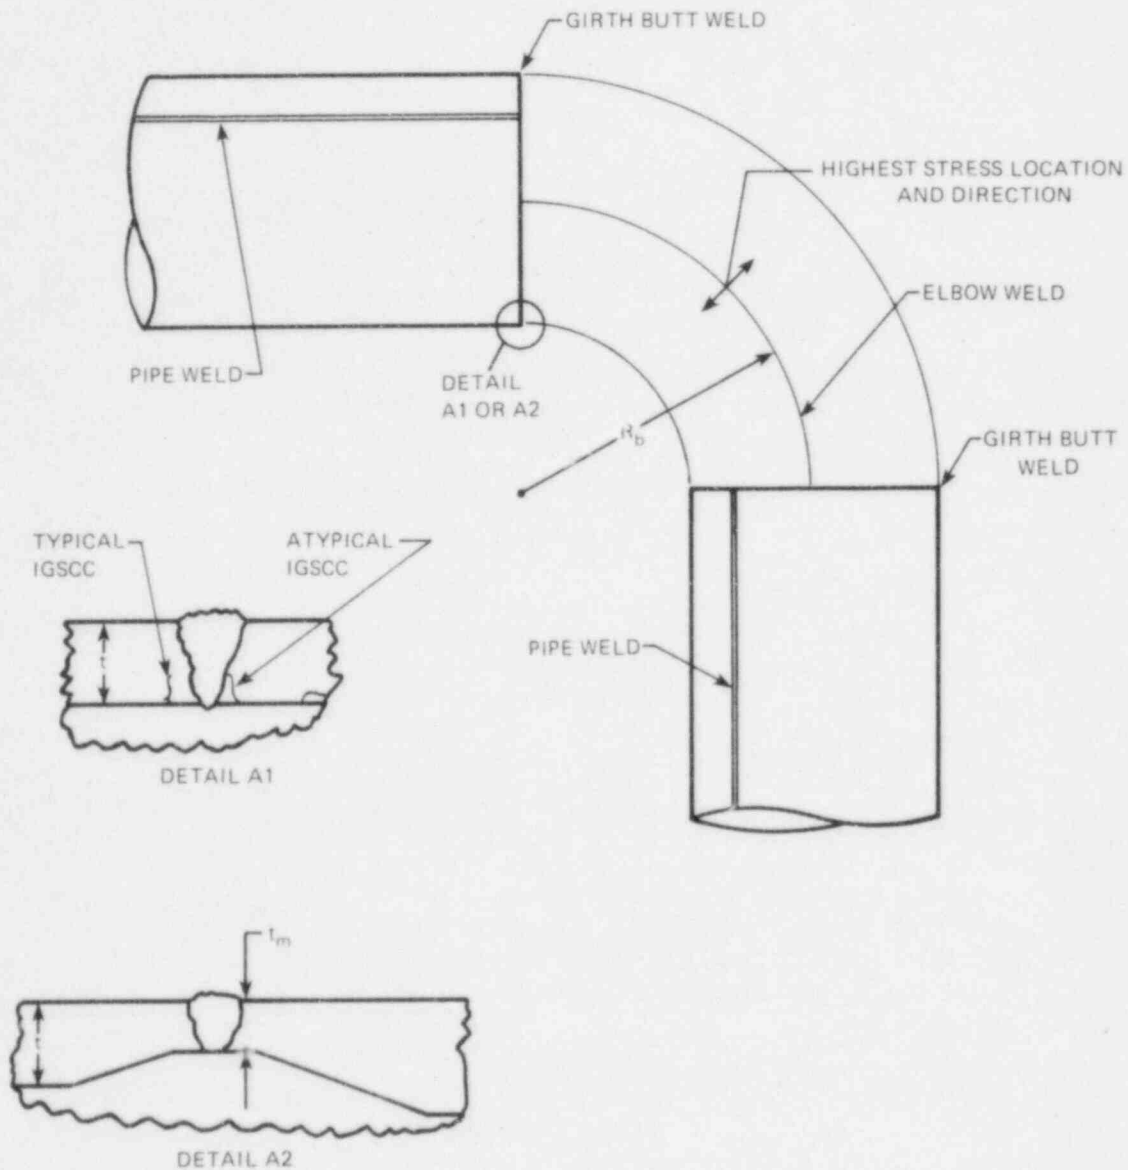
Welds in piping components. Detail A1: Idealized girth butt weld constant around circumference. Detail A2: Not so idealized girth butt weld. Note that  $t_m$  can be significantly less than  $t$ . This kind of detail would probably vary around the circumference.
